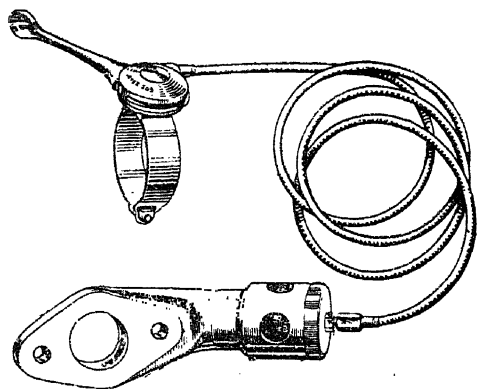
The Bowden Auxiliary Air Fitting (Inlet Pipe Flange Type).
